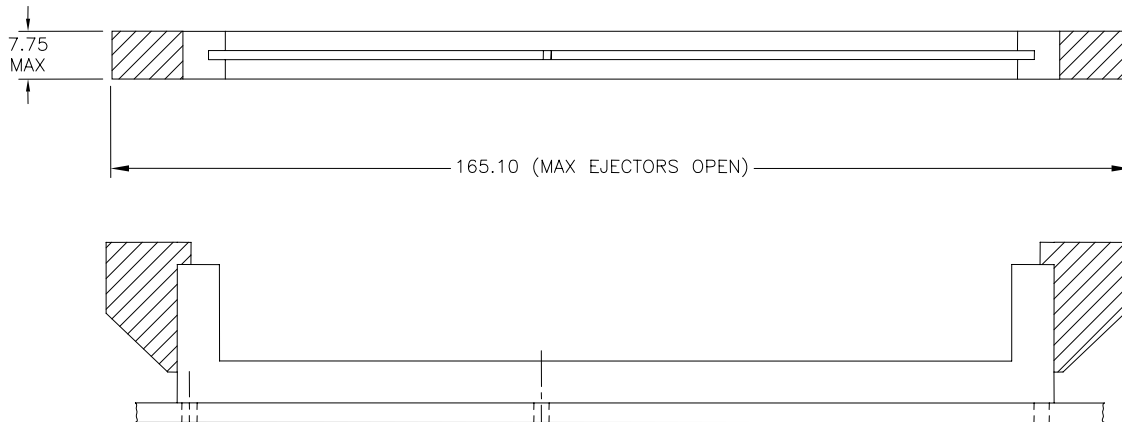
Connector Outline refer to JEDEC SO-007 for details
